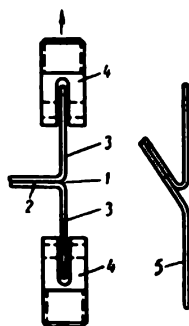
Diagrammatic representation of the Chadwick method for rupture testing of a soldered joint:
